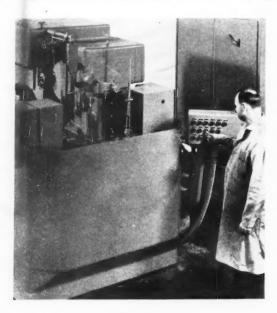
Thompson Truformtic grinder in which production of 4,000 parts per hour may be obtained.
